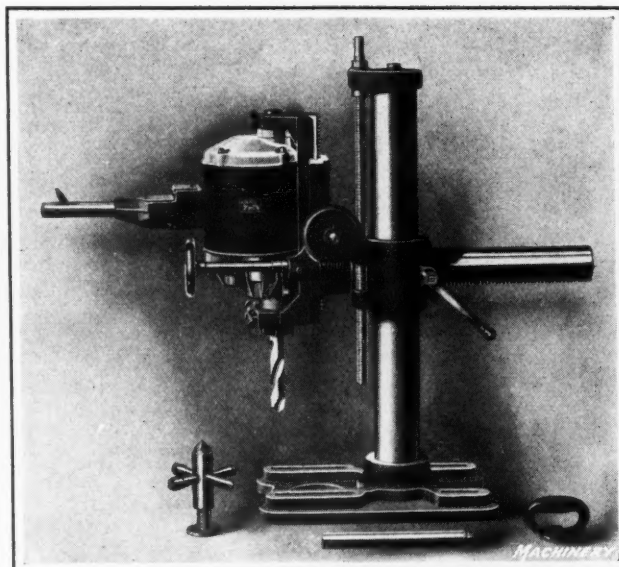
Radial Drill Stand made by the Hisey-Wolf Machine Co.
